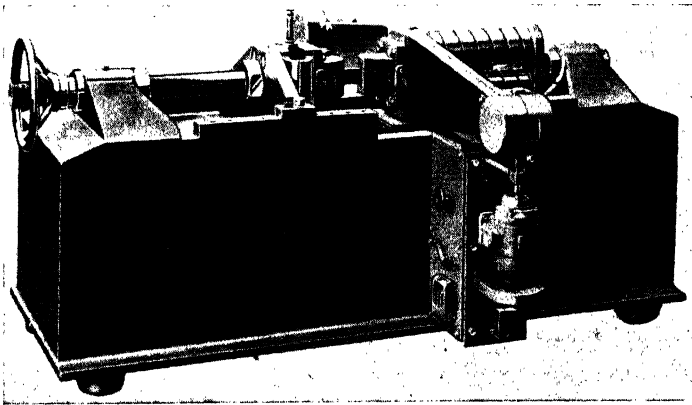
Fatigue Testing Machine which can be used for full-sized machine members.
